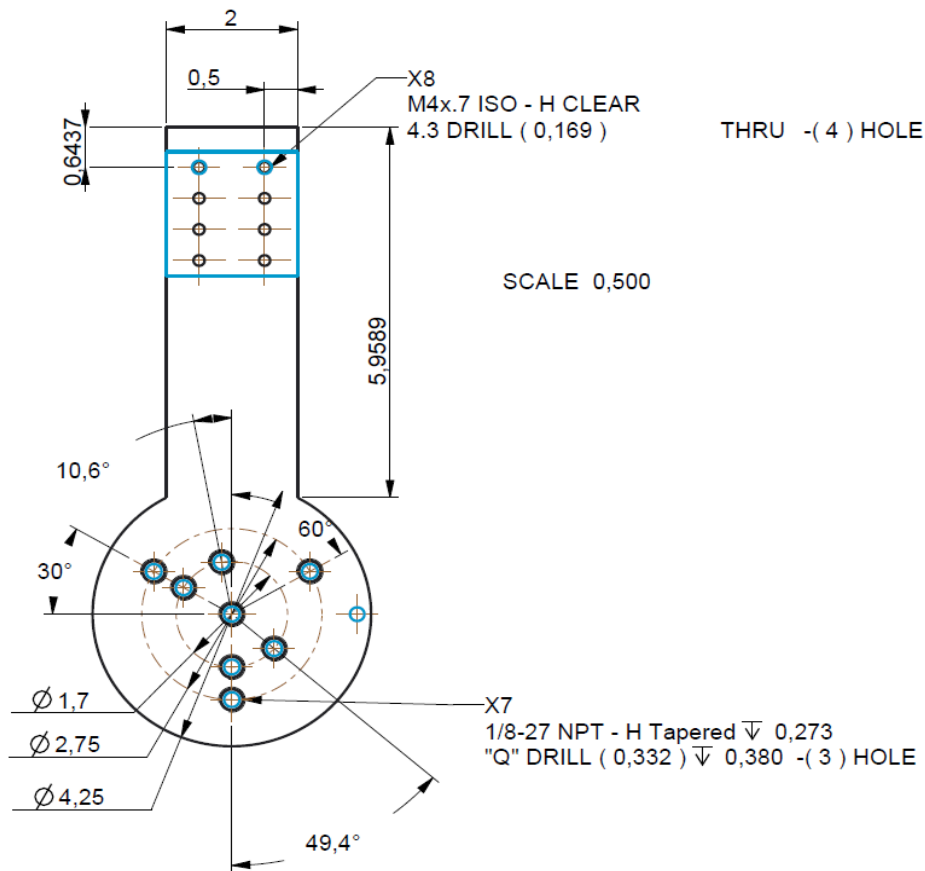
TC holding plate shows threaded fastening holes used to mate plate to traverse and yor-loks to surface of TC holding plate.
